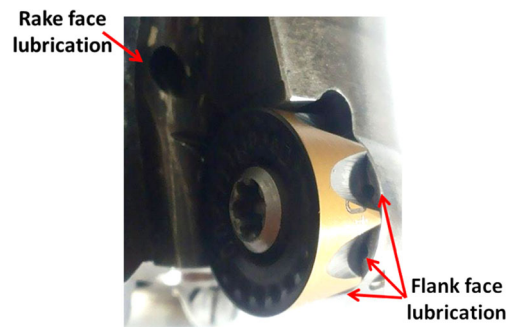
Tool coolant channels to lubricate rake face and flank face
